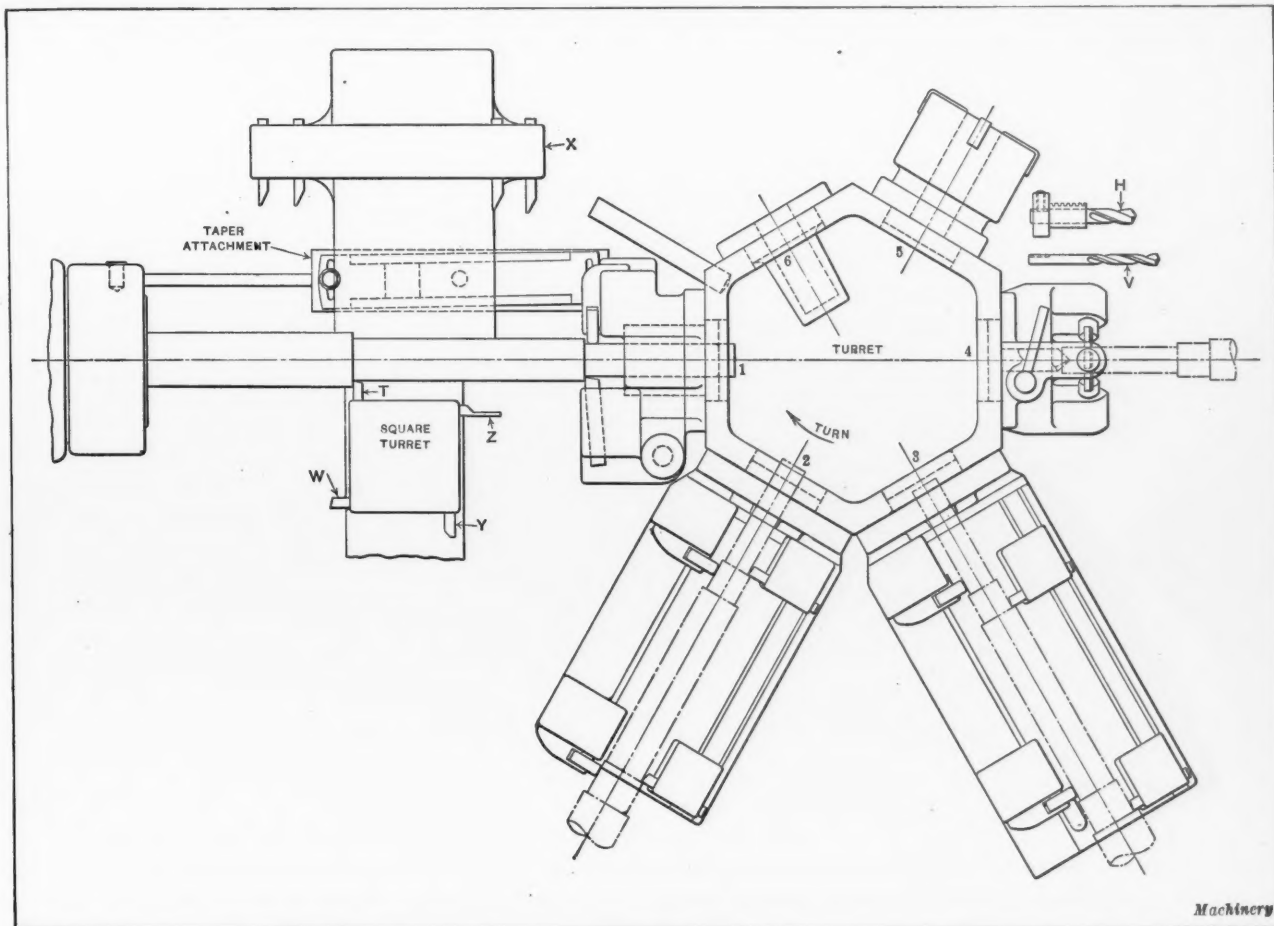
Lay-out of Tooling Equipment used for machining the Steel Spindle illustrated in Fig. 29, in Two Chuckings
